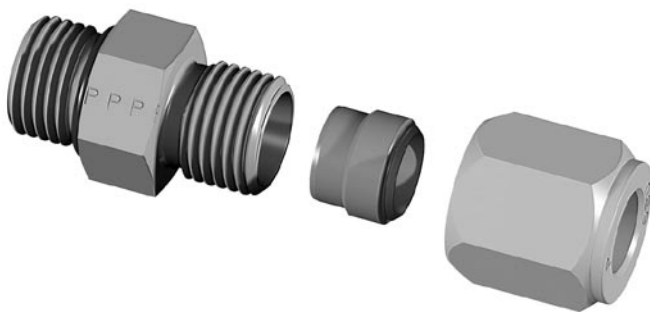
Ferulok Components: Body, Ferrule and Nut
